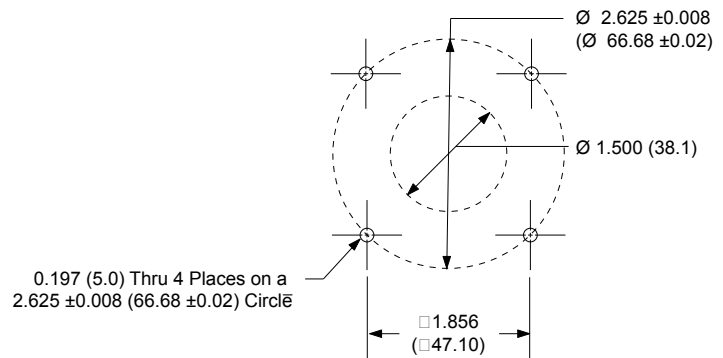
NEMA 23 (57 mm) Mounting hole pattern (not to scale)
